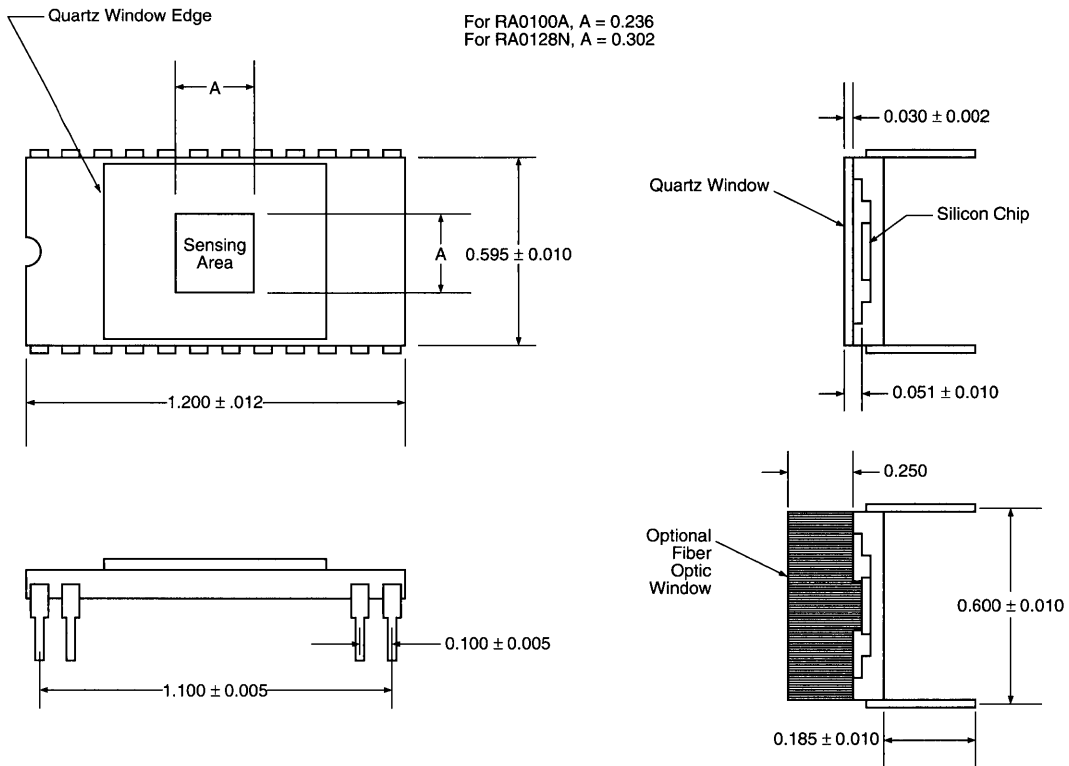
Package Dimensions. Dimensions are in inches except where millimeters (mm) are indicated.
